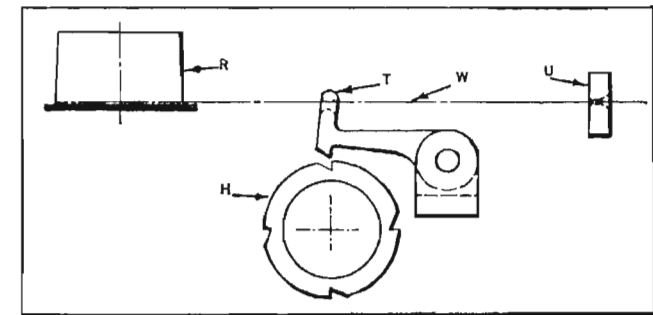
Clutch-tripping Arrangement for Wire Drawing or Similar Process
